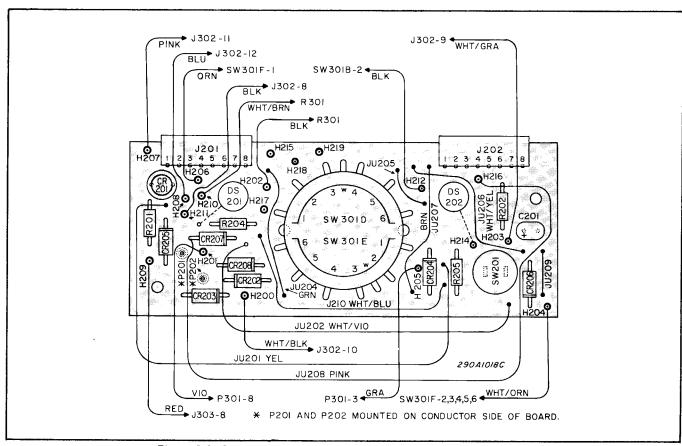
Siren Module Front Circuit Board Parts Location Diagram.
